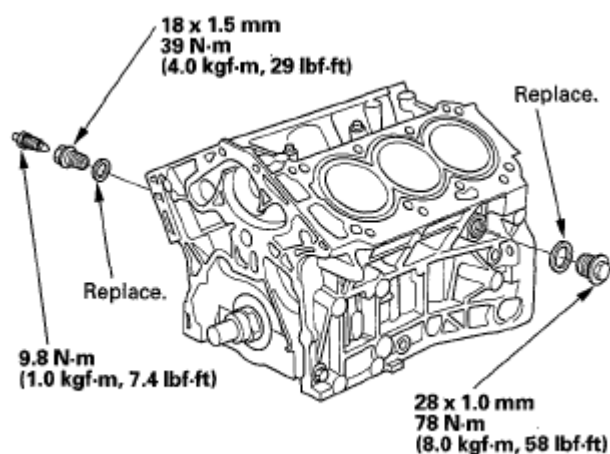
Identifying Sealing Bolt And O-Ring With Torque Specifications
